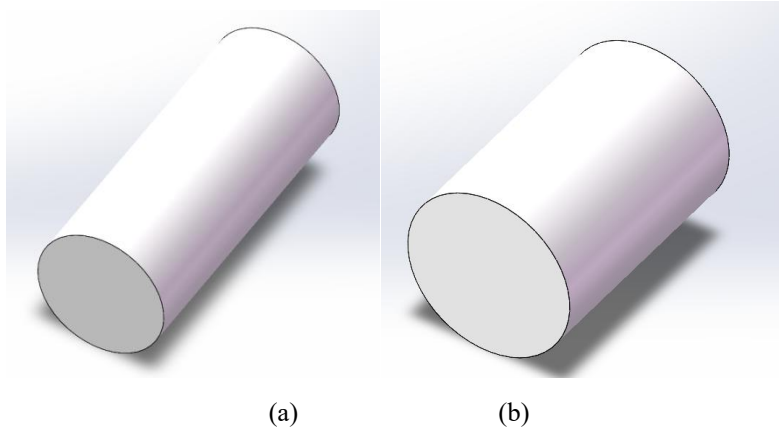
Transmission shaft models (driving shaft and driven shaft)
